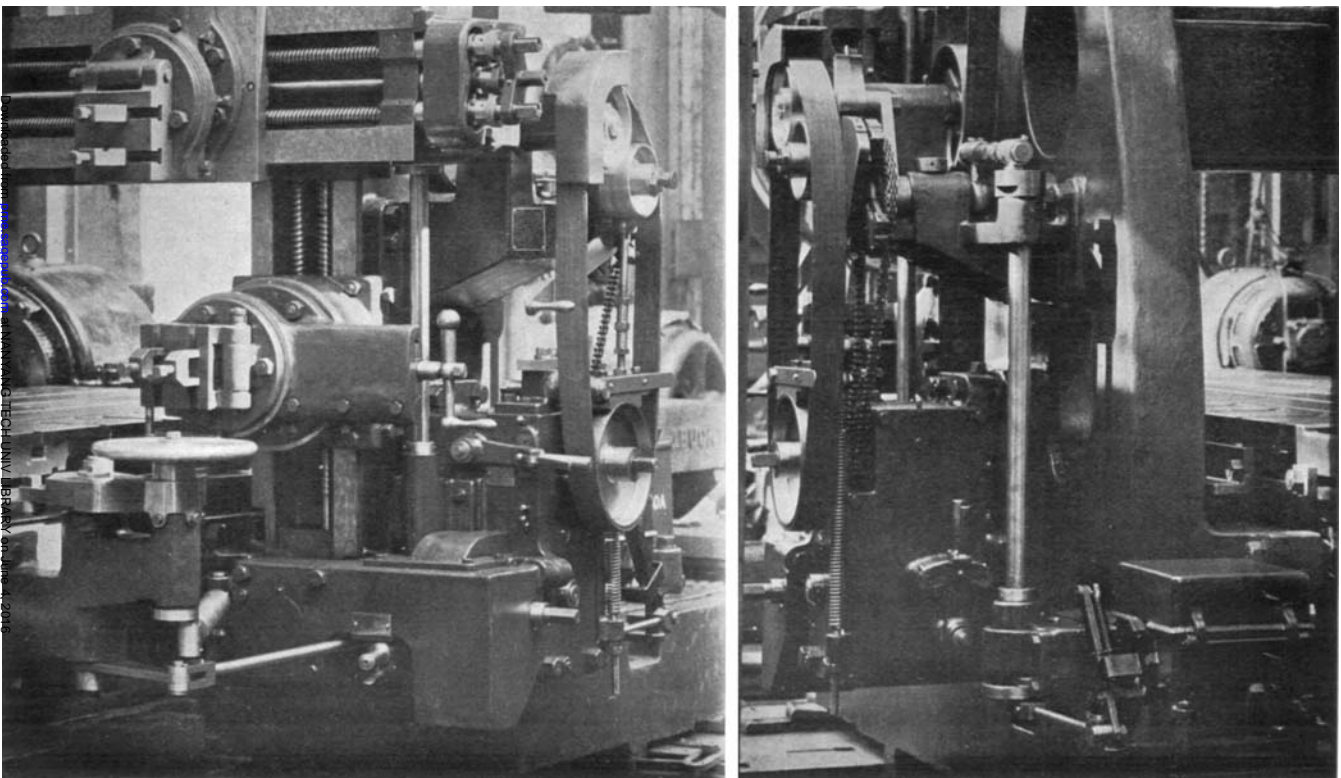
Mechanism for Feeding and Traversing the Tool Boxes and for Raising the Cross-slide for large Planing Machine (Buckton). Plate 63.
